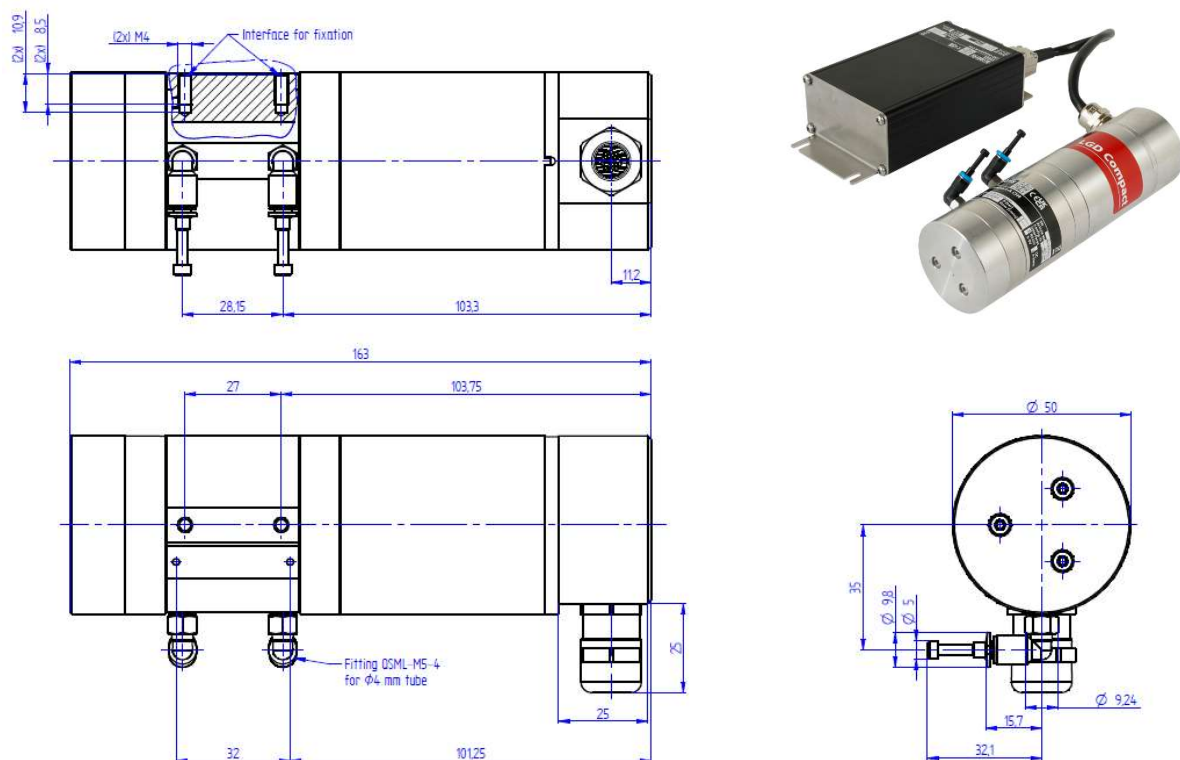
Side and front view, with gas connectors. Dimensions in mm
